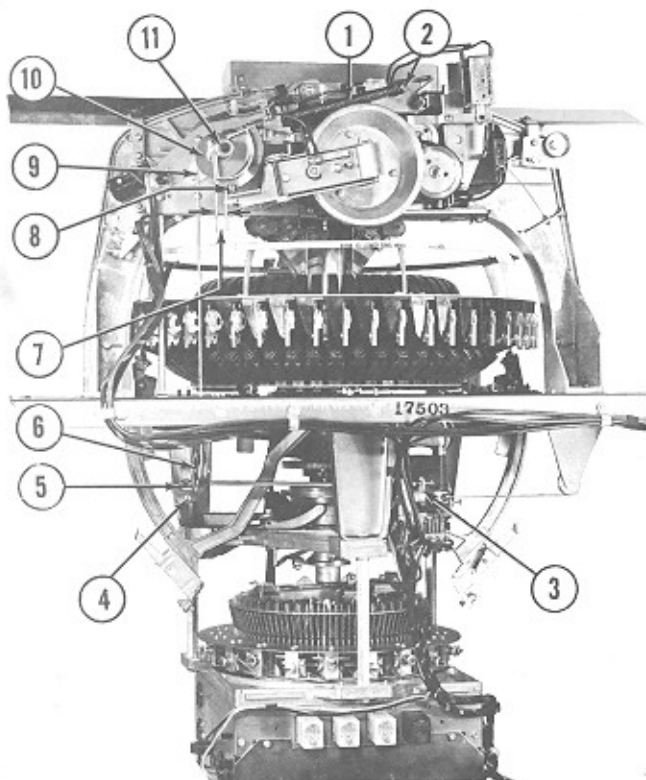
TURNTABLE ACTUATING CABLE ADJUSTMENT
